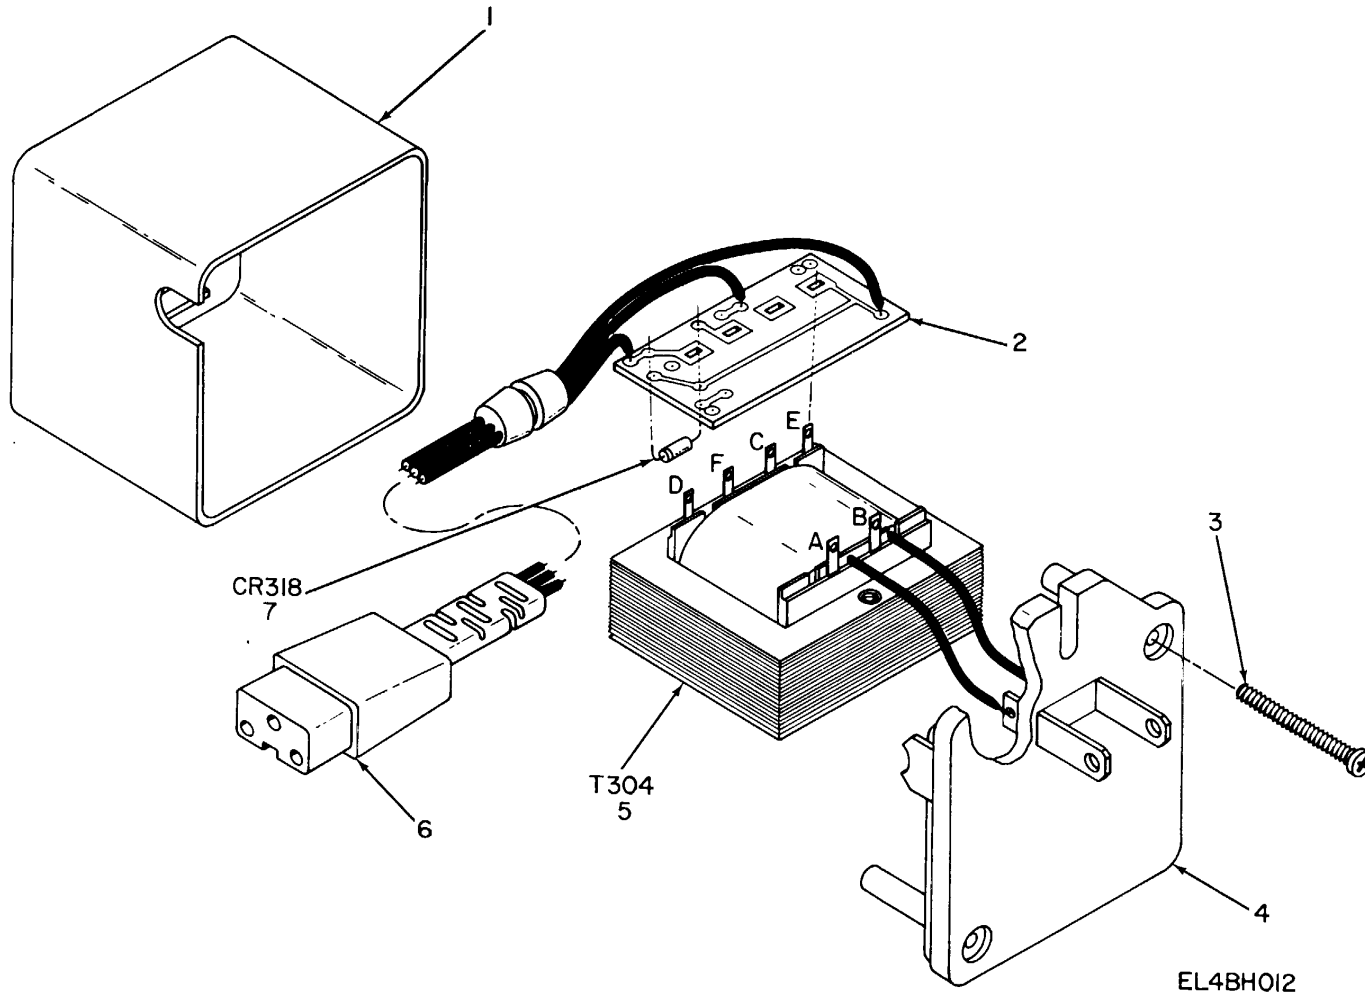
Strobe Assembly, Model 700, AC Power cord Assembly.
